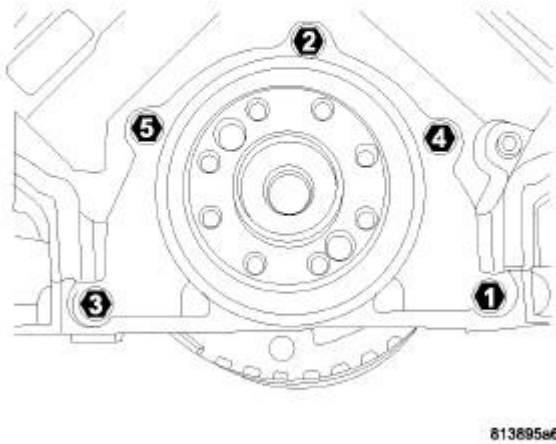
REAR SEAL RETAINER TORQUE SEQUENCE
